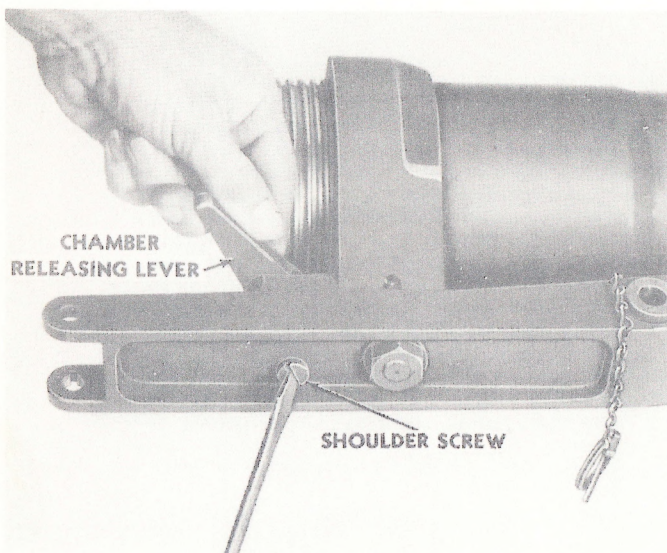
Removing chamber releasing lever by unscrewing shoulder screw.
